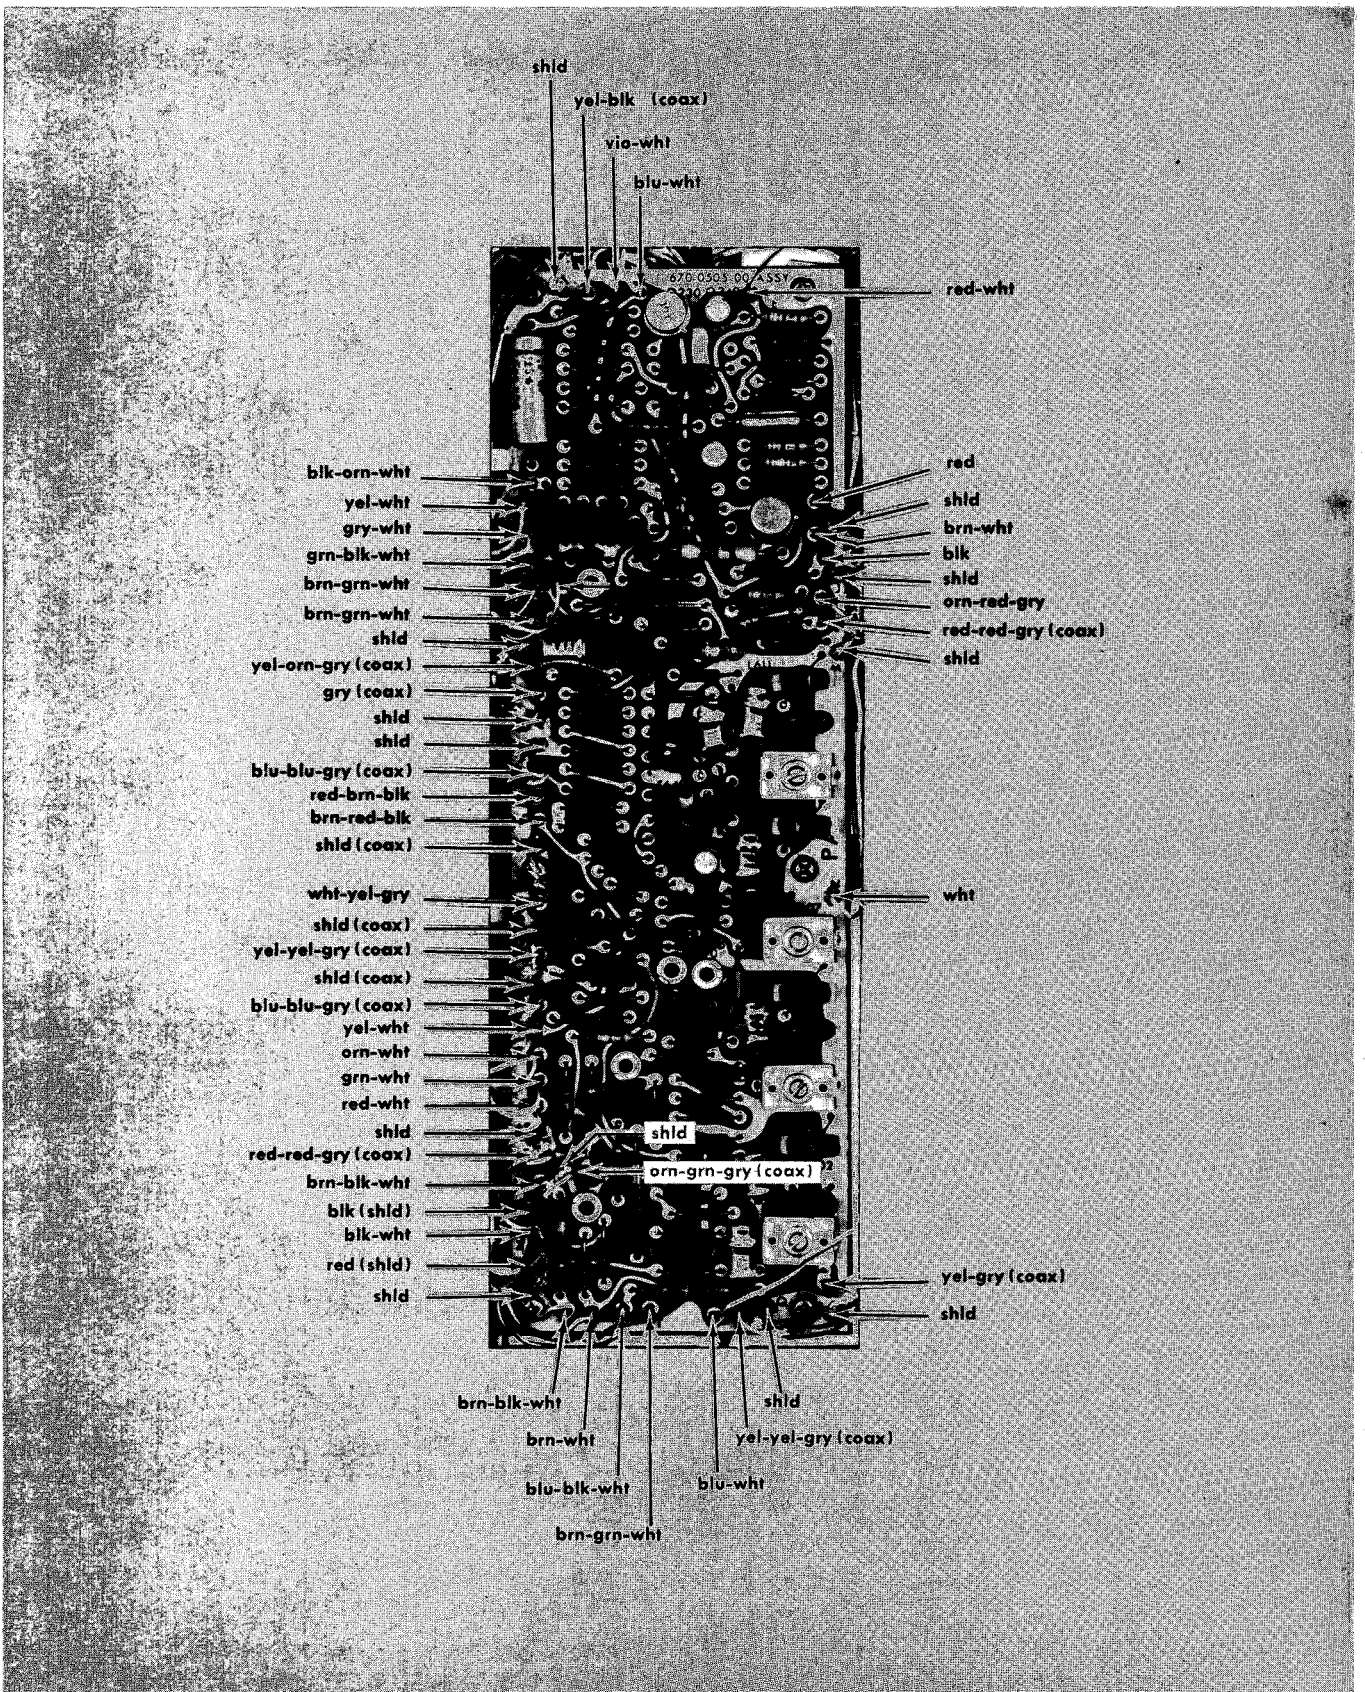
IF Control board assembly. Wiring color code to pin connector.
